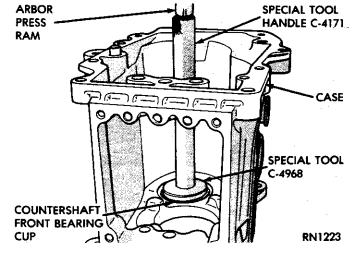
Installing Countershaft Gear Front Bearing Cup
